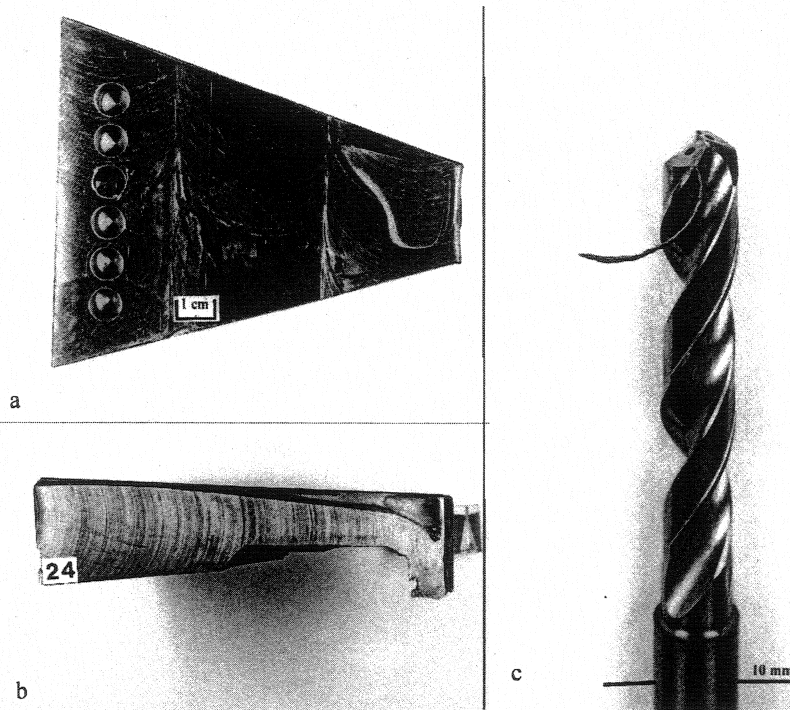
(a, b) The workpiece of stainless steel with NiTi coating used in drilling tests and (c) a TiN-coated  $\varnothing$  8.5 mm solid carbide drill used in drilling tests showing chip buildup on the cutting edge.
